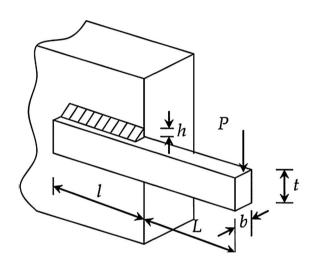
The welded beam design problem (Sadollah et al., 2013).
